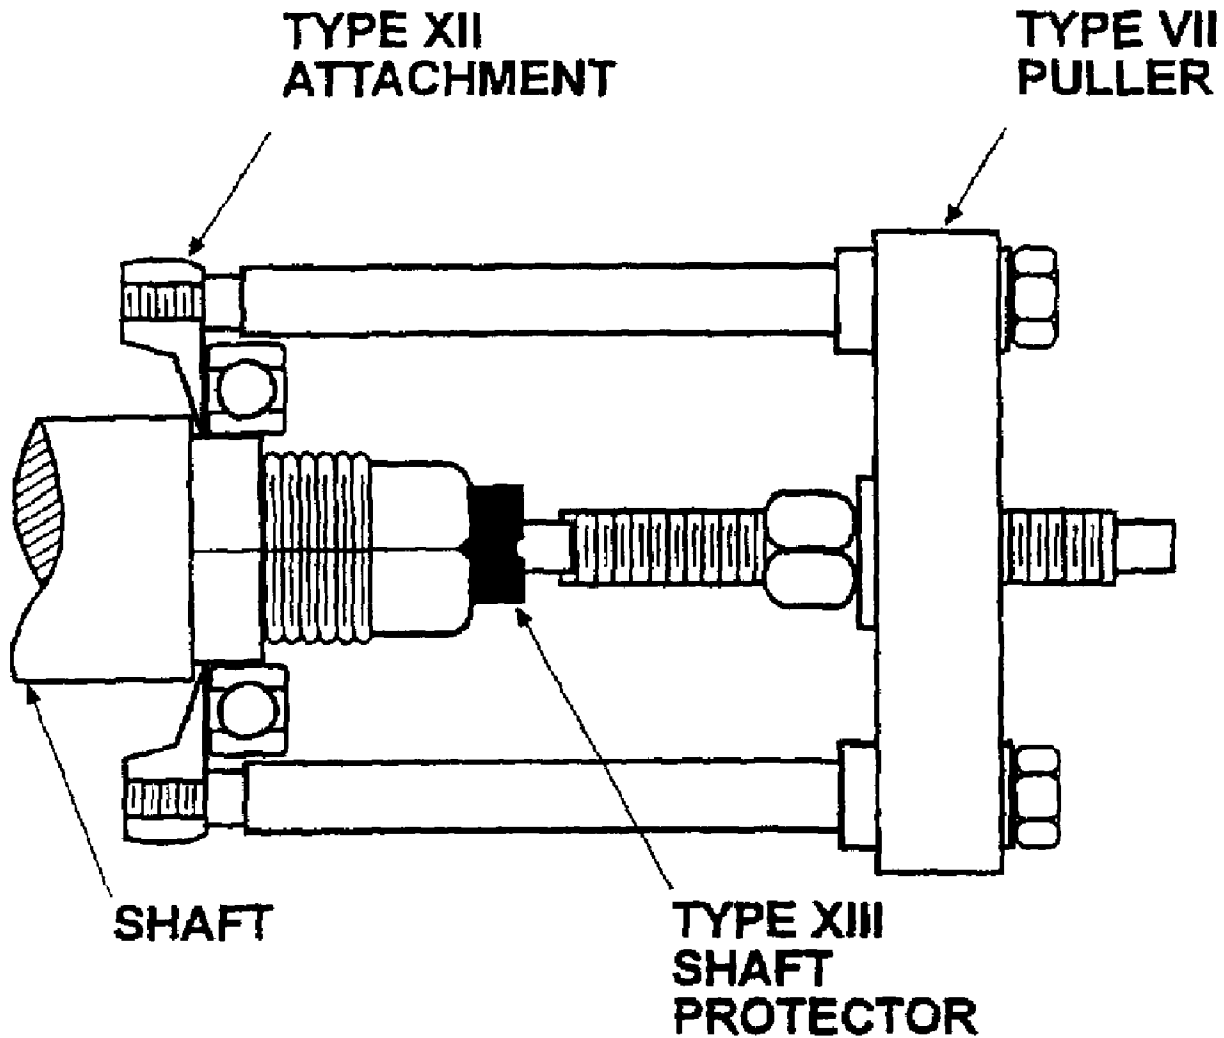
Bearing Puller Removal Using Split Puller Attachment and Shaft Protector
